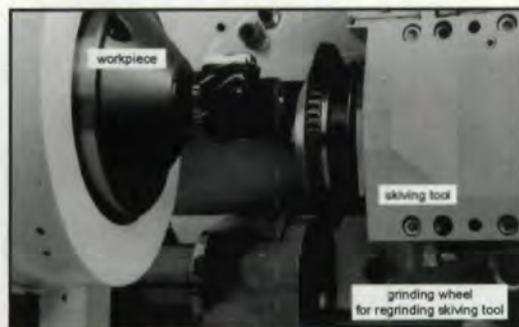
The skiving tool can be reground in the machine. Source: Pfauter
